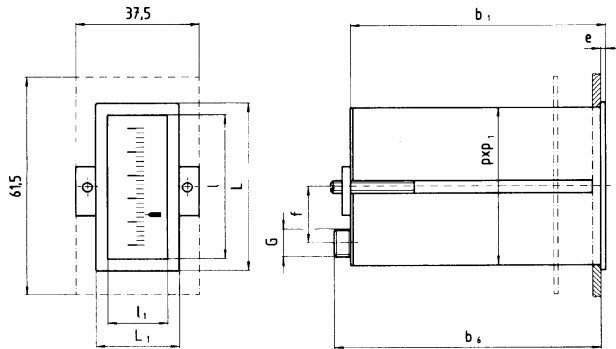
= same as Fig. 104, with front ring for flush-mounting, to DIN 16 280, style A
